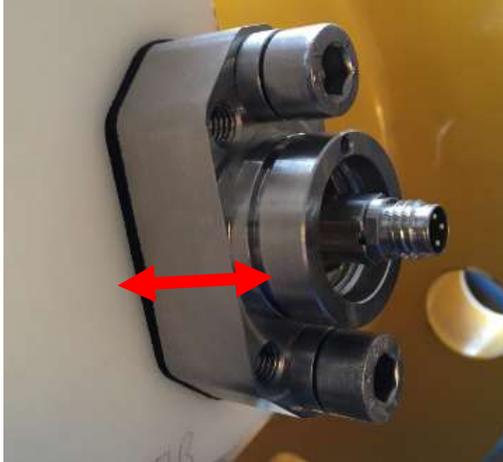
pull and push the mounting bracket to ensure it's free to move a bit
